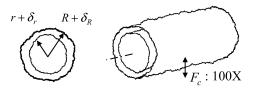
Fitting of valve core and valve sleeve considering both dimensional discrepancy and form error.
